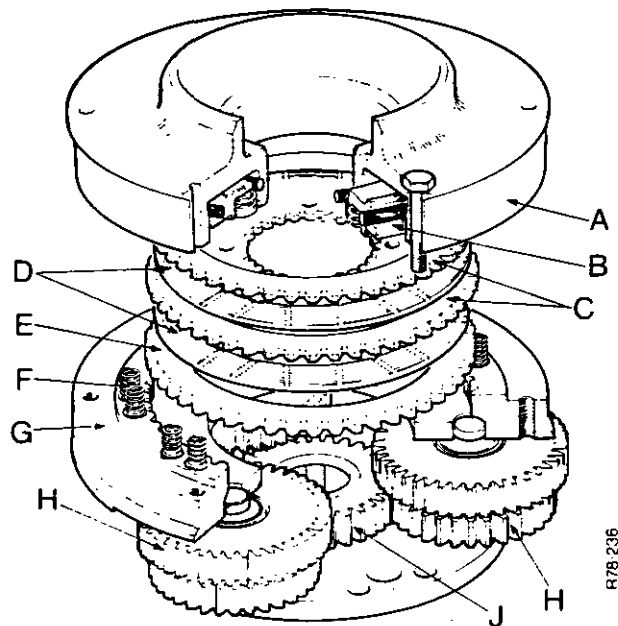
PLANETARY UNIT LOCK-UP CLUTCH
